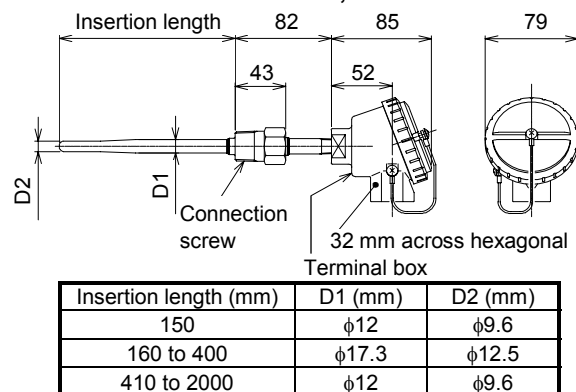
Dimensions (mm): Models TY7830A to TY7830F, TY7831A to TY7831F
